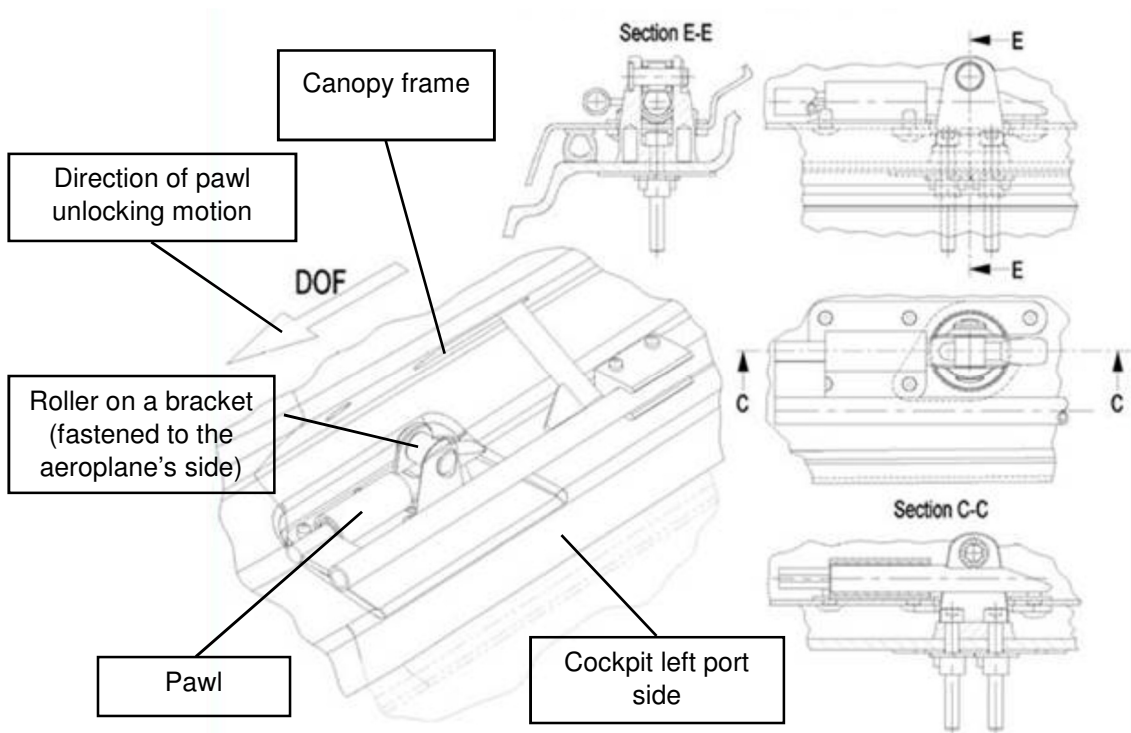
Cockpit forward lock assembly fitting mechanism aboard the Extra NG
